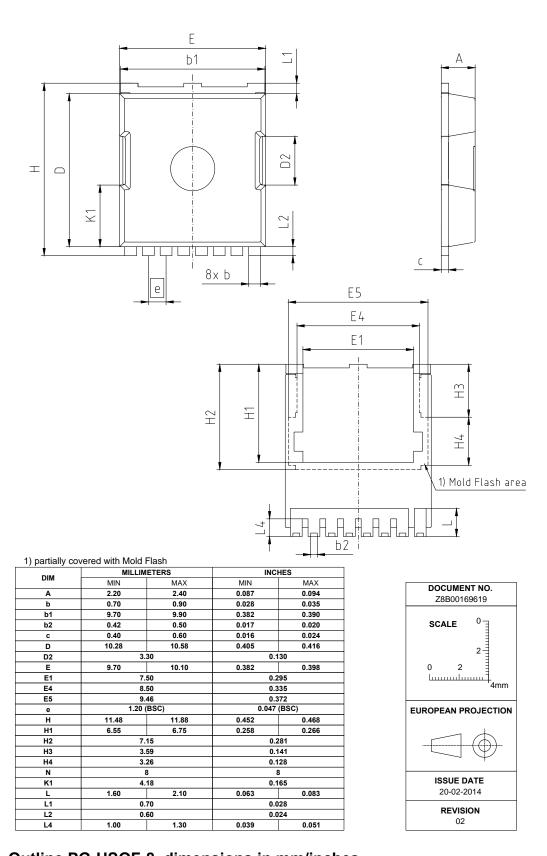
Outline PG-HSOF-8, dimensions in mm/inches
